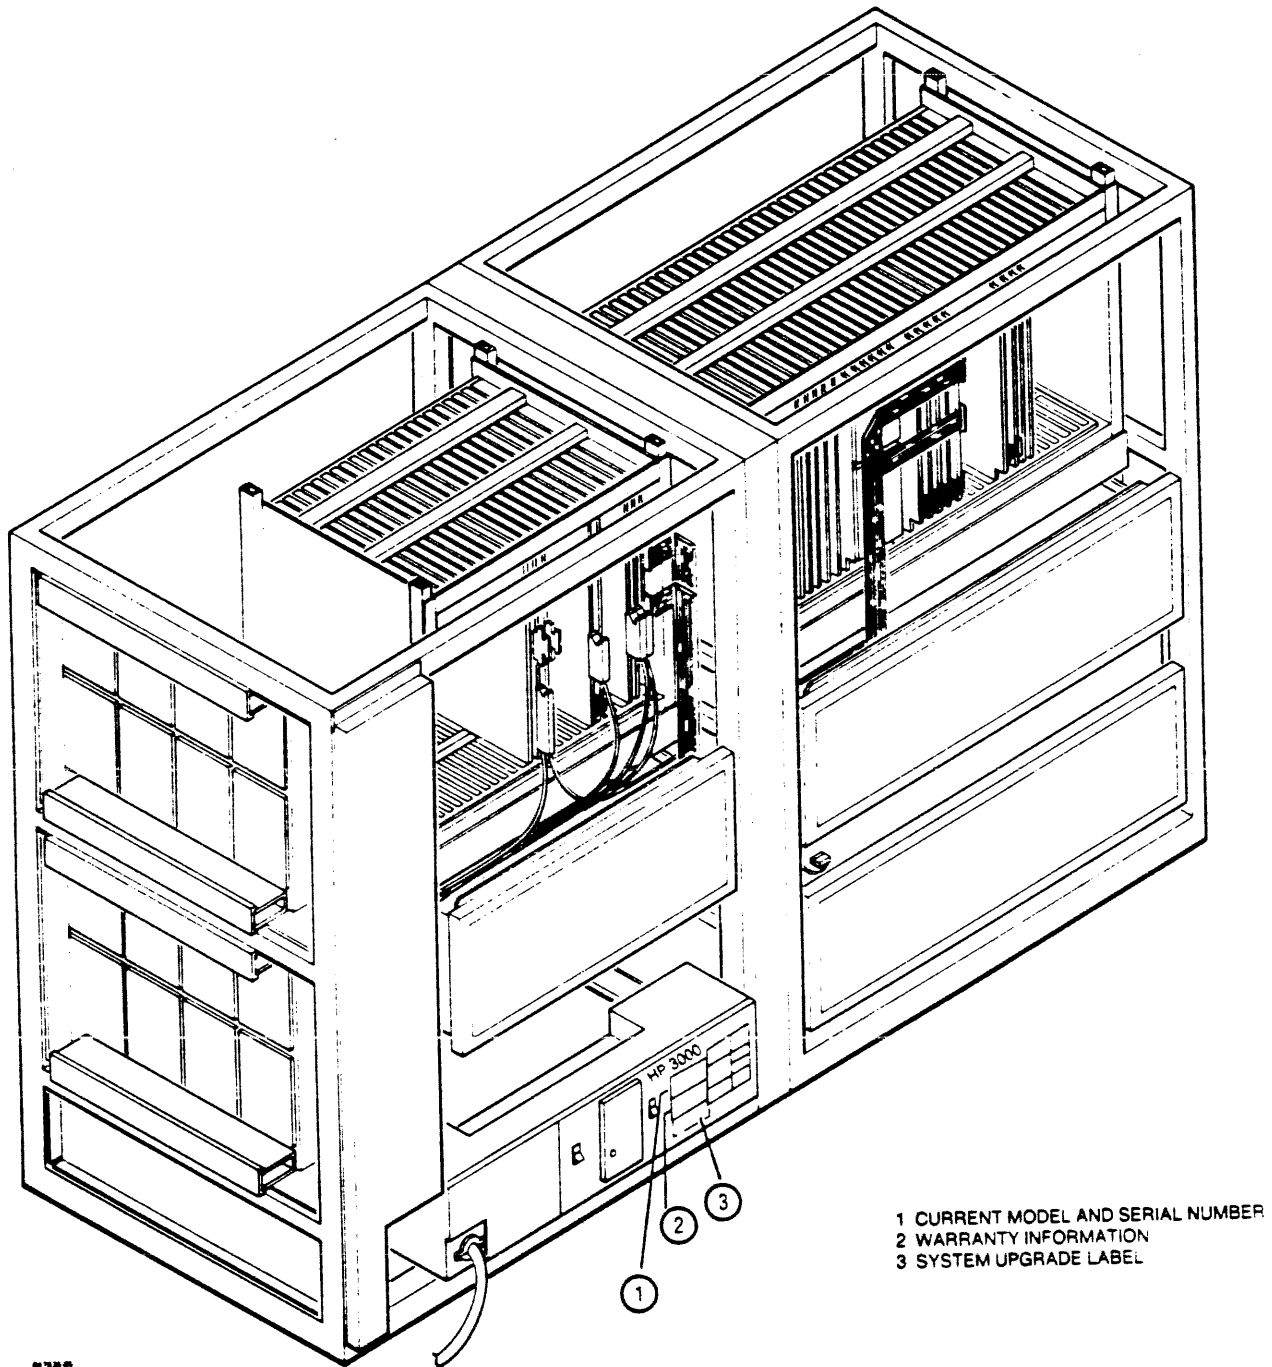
SPU Rear View (HP 32460A/68A), Panels Removed.
